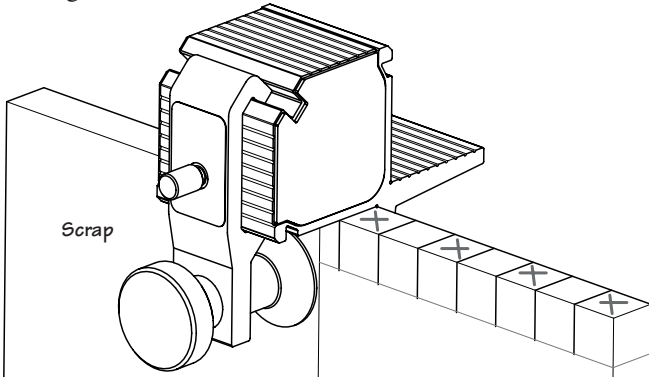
Using a scrap piece of wood adjacent to the workpiece to secure the guide for the last cuts.
